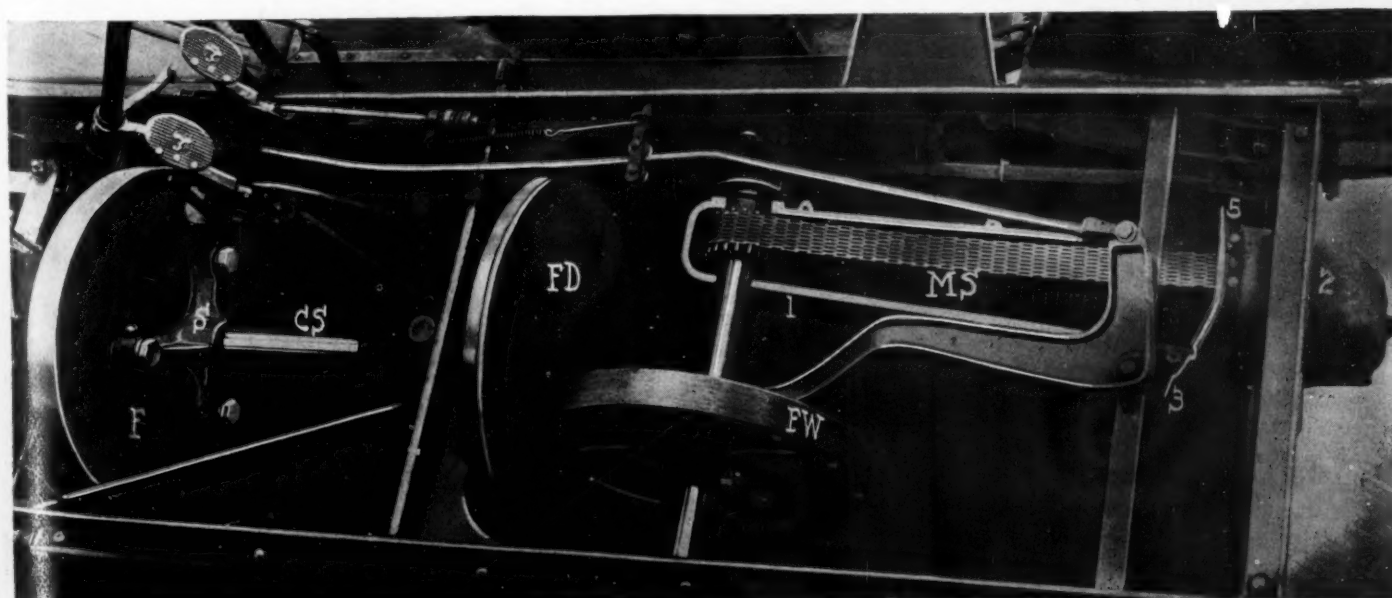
ENCLOSED MORSE SILENT CHAIN DRIVE INTRODUCED ON LAMBERT CARS
